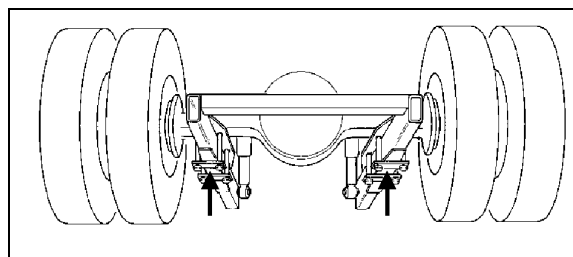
JACKING POINTS ON DRIVE AXLE OEH3B762
